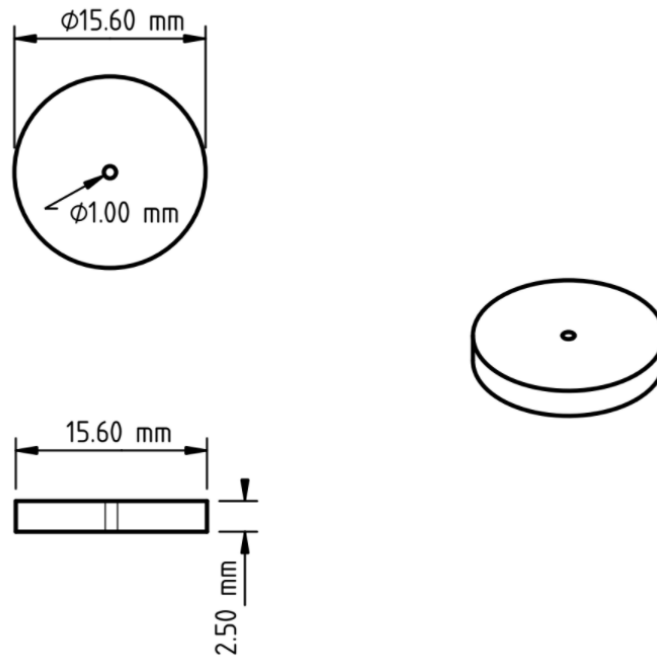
Drawing of piece of the center post that was manufactured. Eleven such pieces will be stacked (with laser cut pieces of shim stock providing the airgap spacing) to form the center post.
